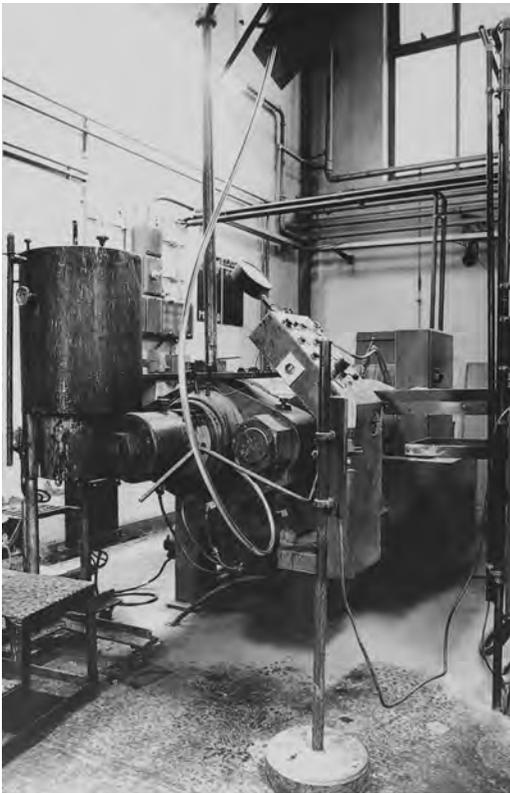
Oil-operated 2500 kN solder wire extrusion press as shown in Fig. 5.5 with extruded hollow solder emerging transverse to the press longitudinal axis. The vessel on the left-hand side is filled with flux and linked by a tube to connection 1 on the hollow mandrel 2 in the extrusion tool in Fig. 5.6. The container is located above the hollow mandrel, and the usually very liquid flux heated to approximately 60 to 120 °C flows under hydrostatic pressure to the hollow mandrel.
